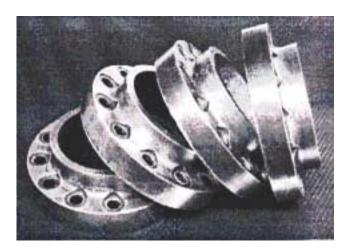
Al MMC prototype flanges for X-33's fuel line ducts.
